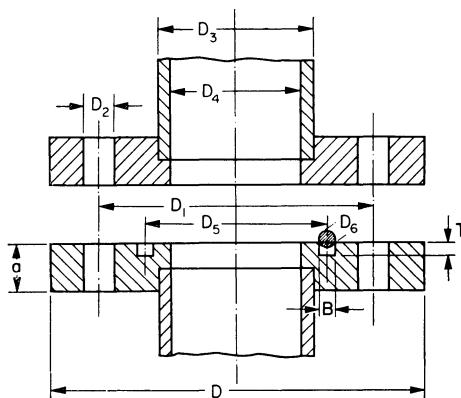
Dimensions of flanges for O-ring seals (Table 3.31)
